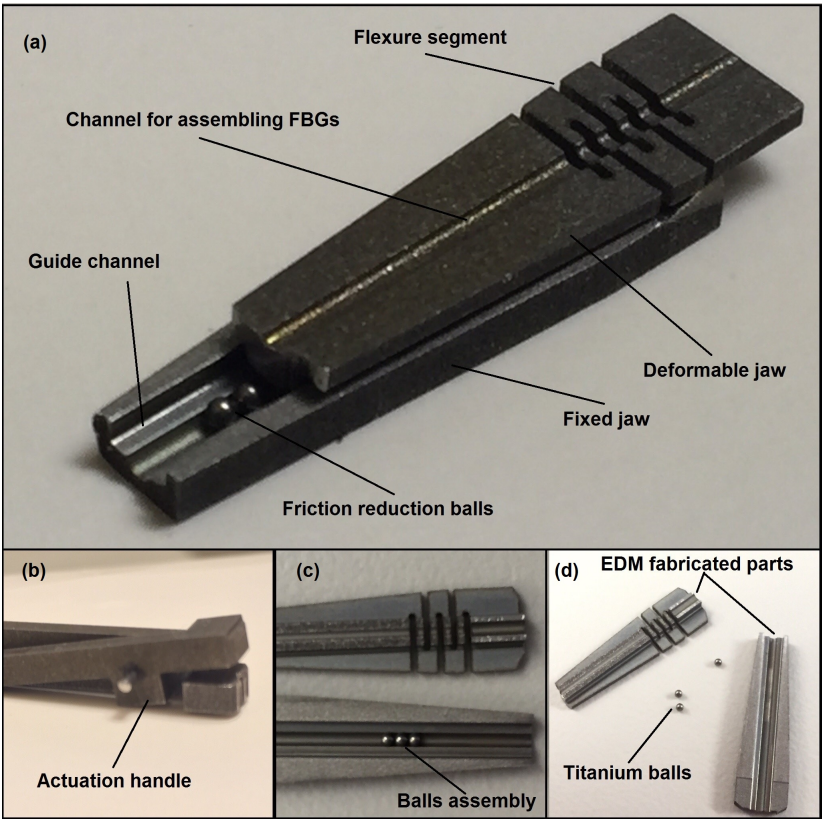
a) Assembly of EDM fabricated pieces; b) Actuation handle; c) Ball placement in the guide channel; d) Grasper pieces before welding (used with permission) [153].
